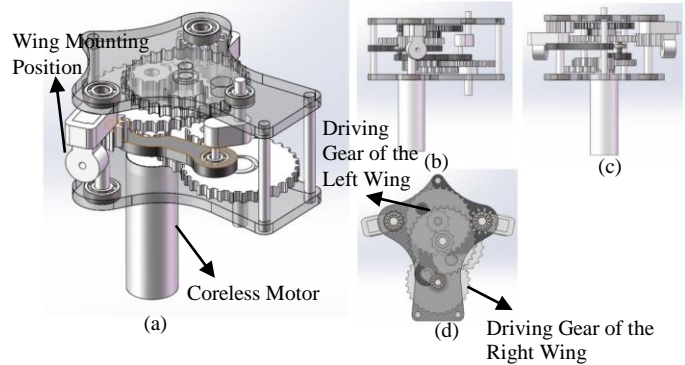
3D models for the design of gears: (a) general view, (b) side view, (c) front view, and (d) top view.
